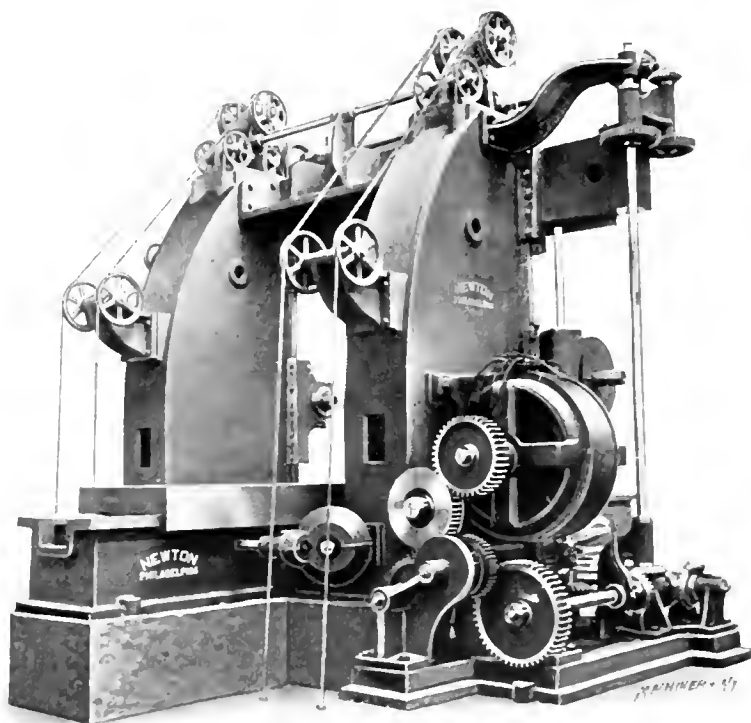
Rear View of Four-spindle Milling Machine, showing Driving Gearing.
